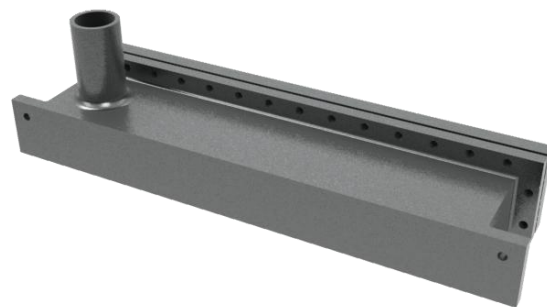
Illustration of nozzle attachment at the end of the side plate
